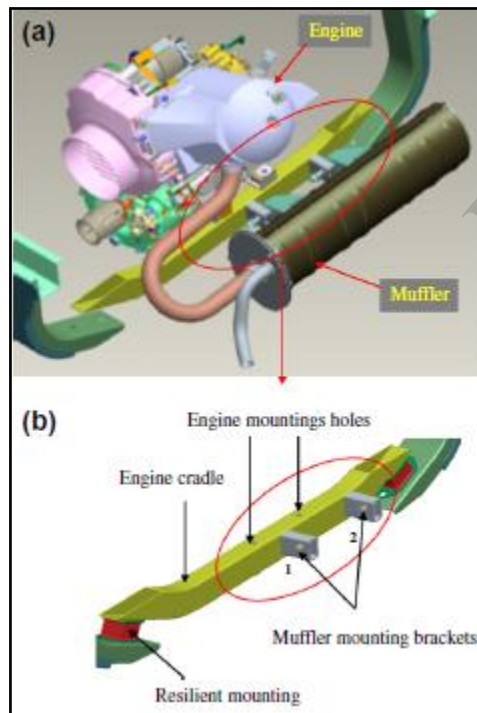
(a) Muffler and engine mounting system on the engine cradle and (b) Engine cradle showing the design of the two muffler mounting brackets [3].
